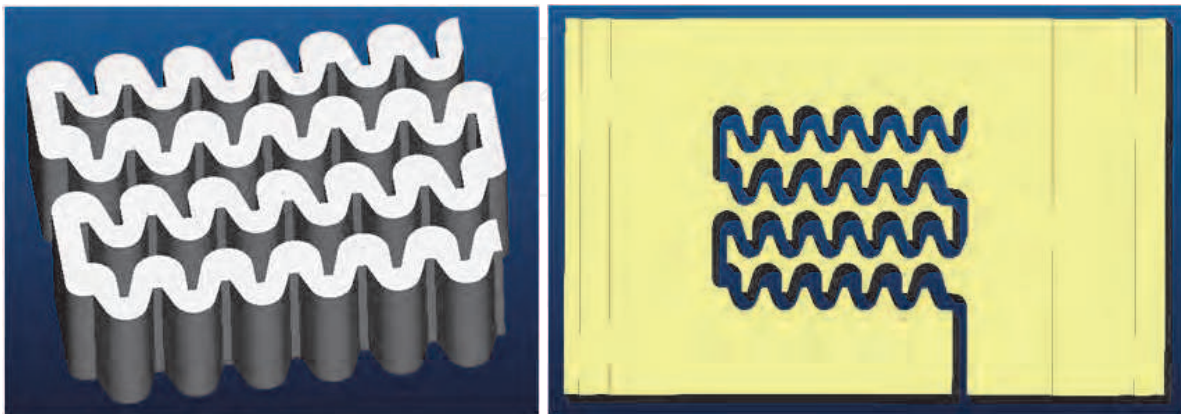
Diagram of labyrinth grooves and channels inserts pieces
